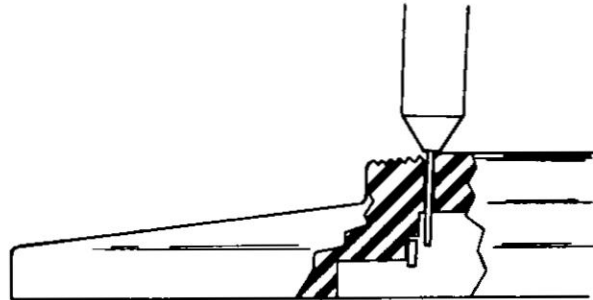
Withdrawal. Latching Tab has Snapped into Recess Molded in Fingerwheel out of Reach of Tool.
